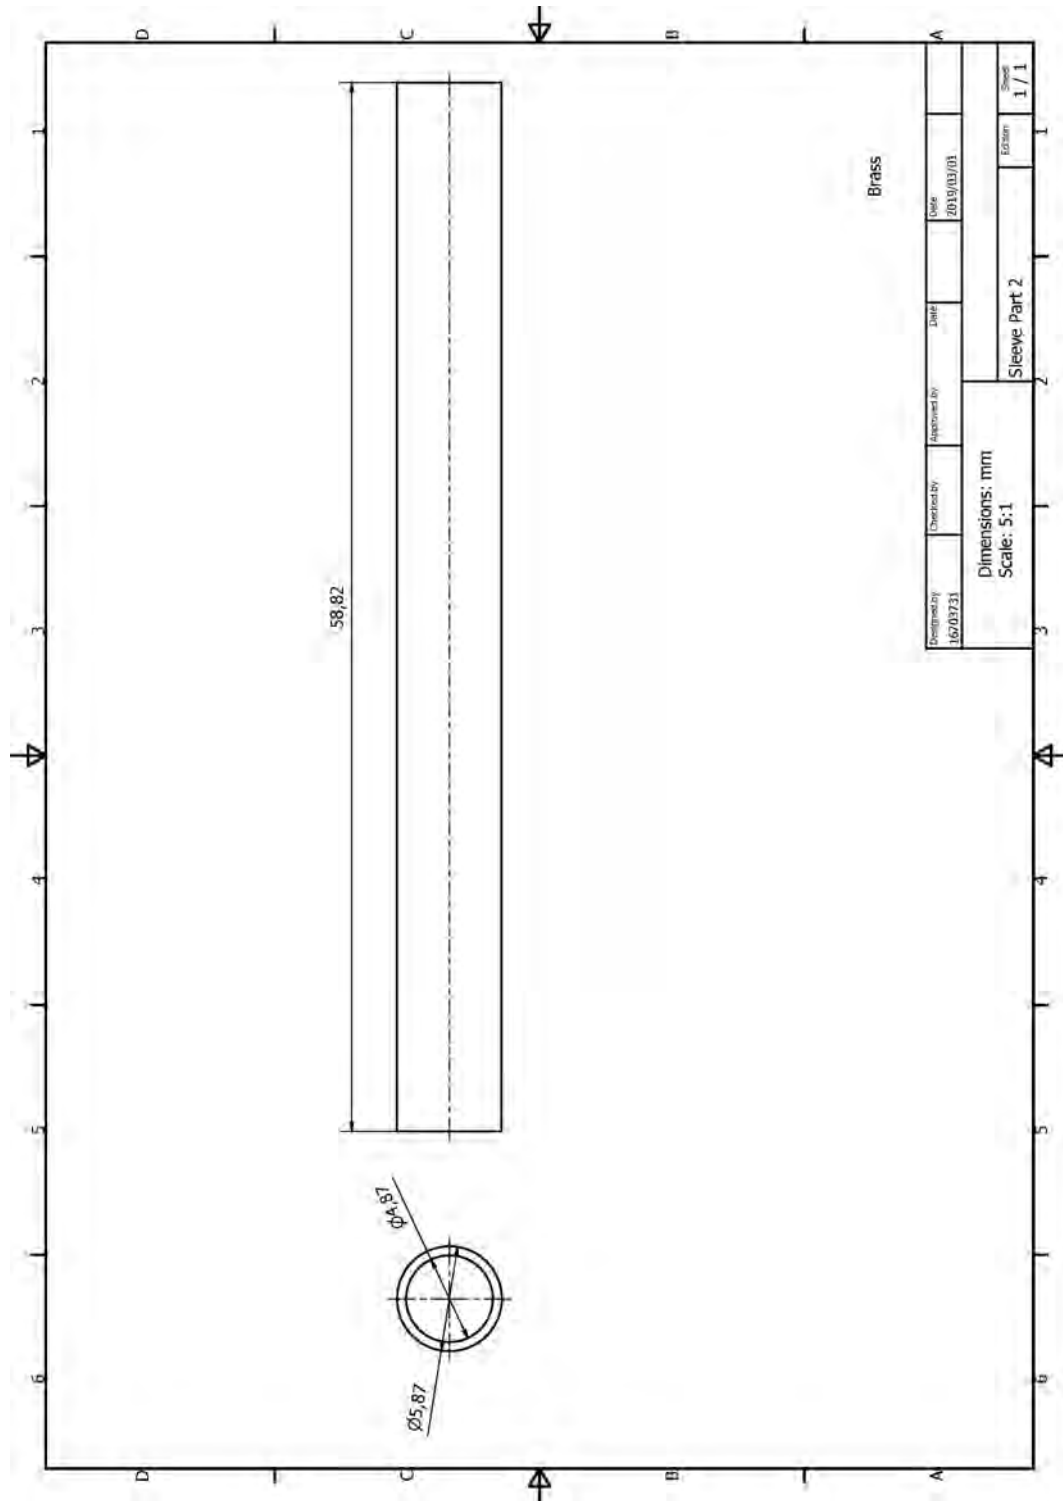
1:100 scale model sleeve balun part 2 engineering drawing. This engineering drawing shows the sleeve component of the sleeve balun, of both models.
